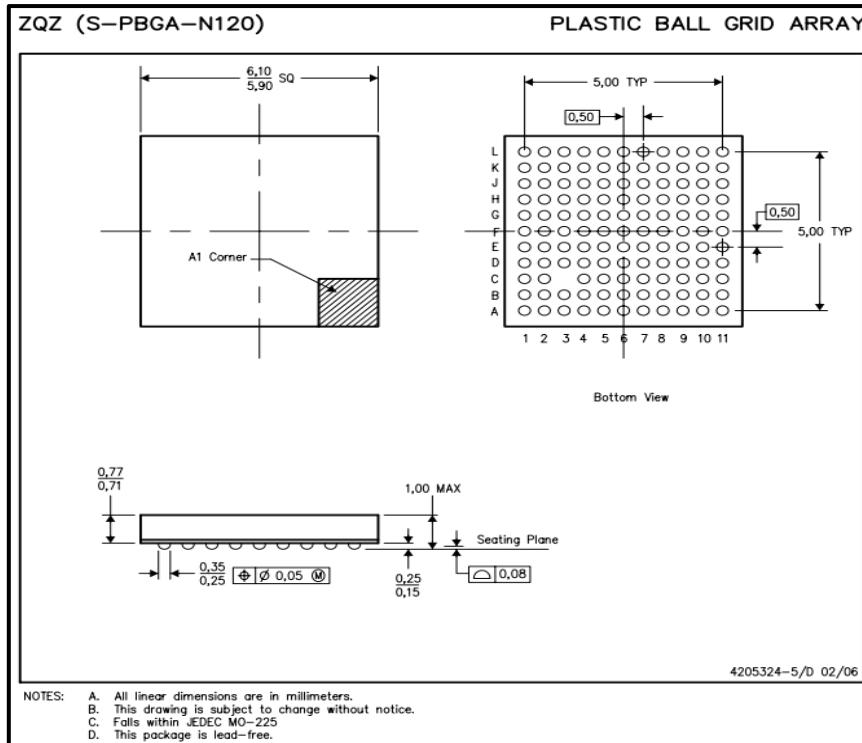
Micro star BGA drawing used to obtain unknown dimensions of BGA package
